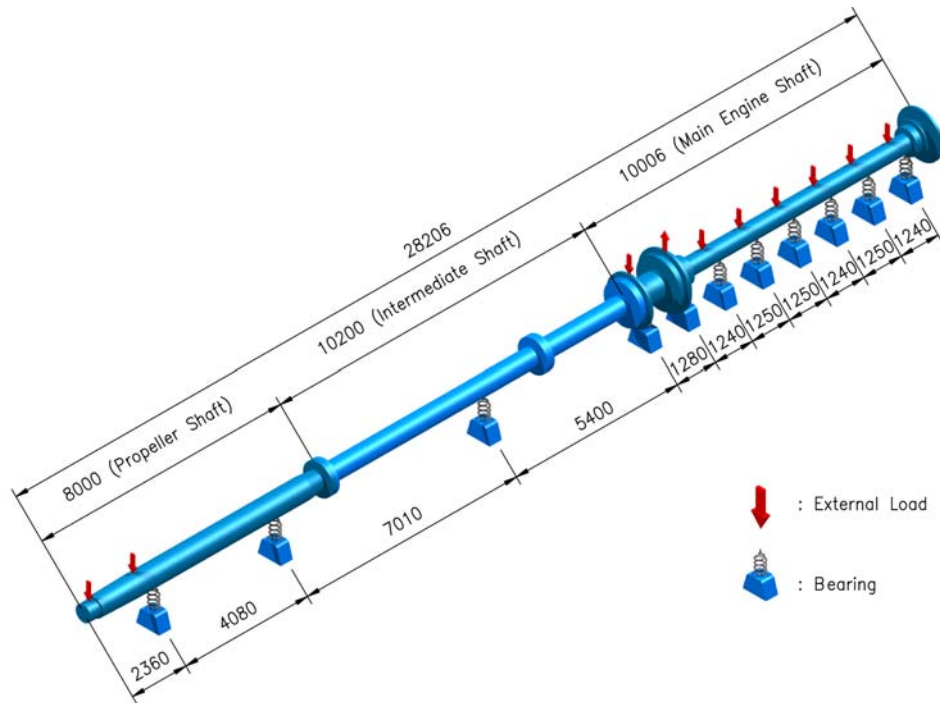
Modeling of shafting system for shafting alignment calculation(e)
